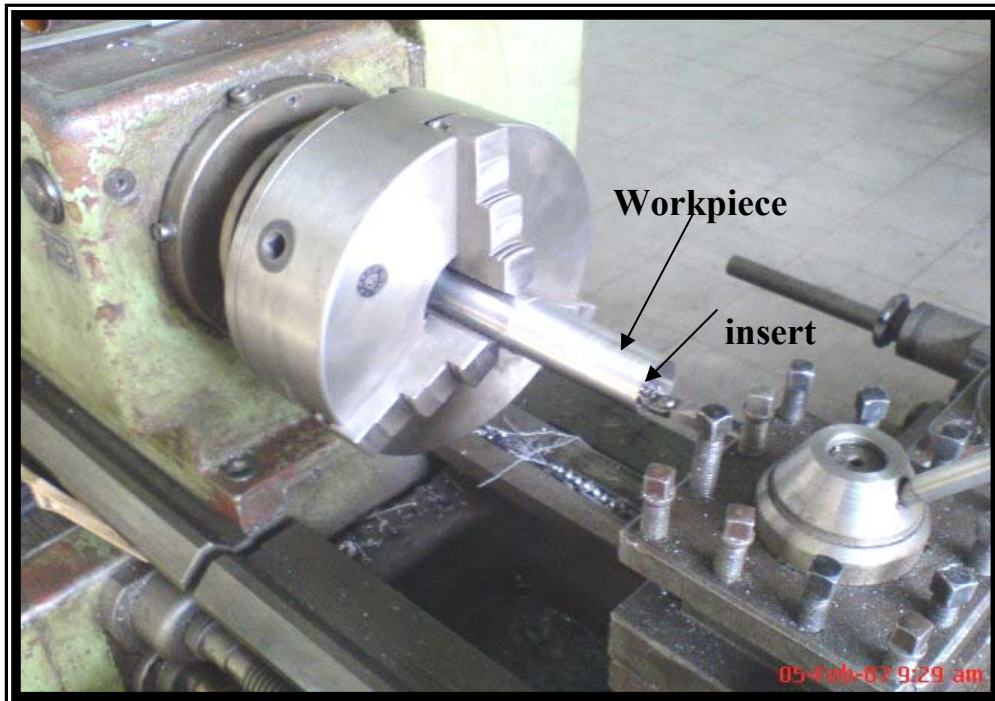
Photograph of the turning machine, showing the workpiece and insert used.
